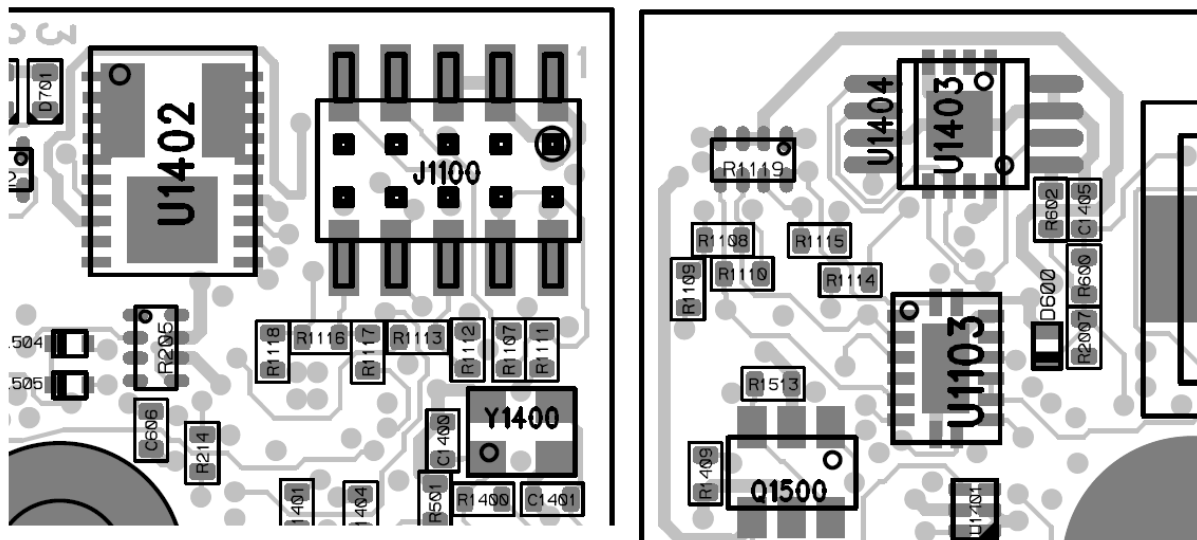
HPS JTAG Connector Resistors - Assembly Drawing Top and Bottom Views
